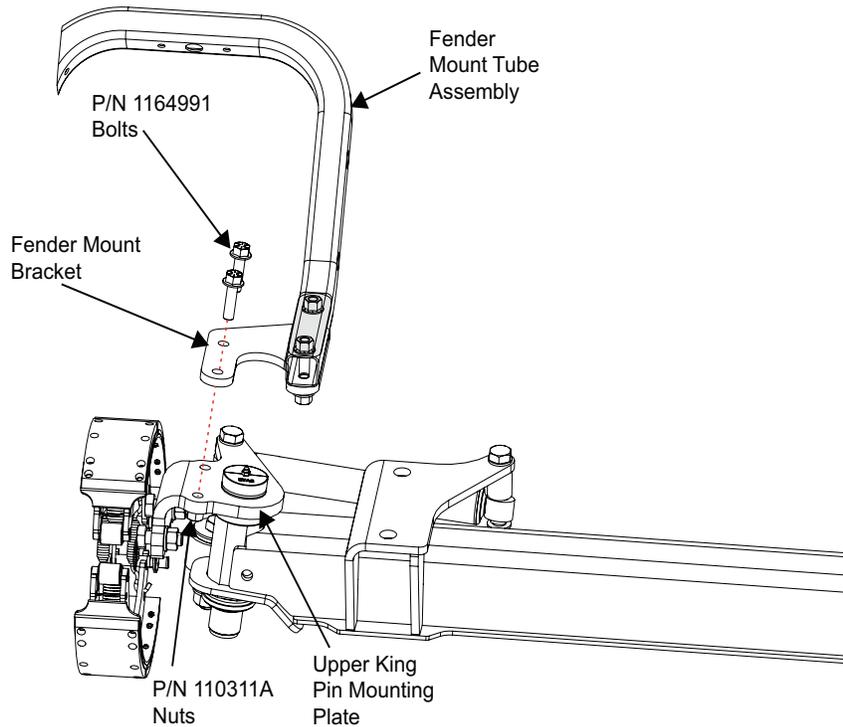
Align the fender mount tube assembly/fender mount bracket to the upper king pin mounting plate.
